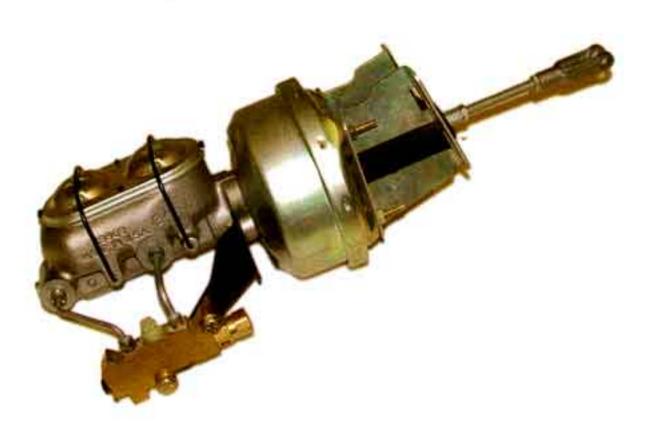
Assemble the booster, brackets, new pushrod and clevis, master cylinder and valve before mounting it to the firewall. Be sure the new clevis engages the pedal swing arm under the dash. Adjust the new pedal clevis rod so there is about 1/2" free play in the pedal. Attach the booster check valve located at the bottom right side of the booster, to an intake manifold or carburetor baseplate vacuum source using 1/2" reinforced power brake hose. Run the brake lines by following steps 5-7, add fluid and bleed.
